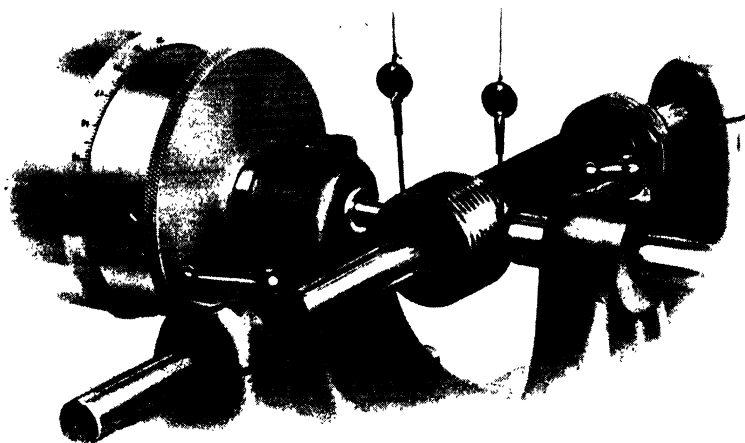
CLOSE-UP VIEW OF P.V.E. DIAMETER-MEASURING MACHINE
